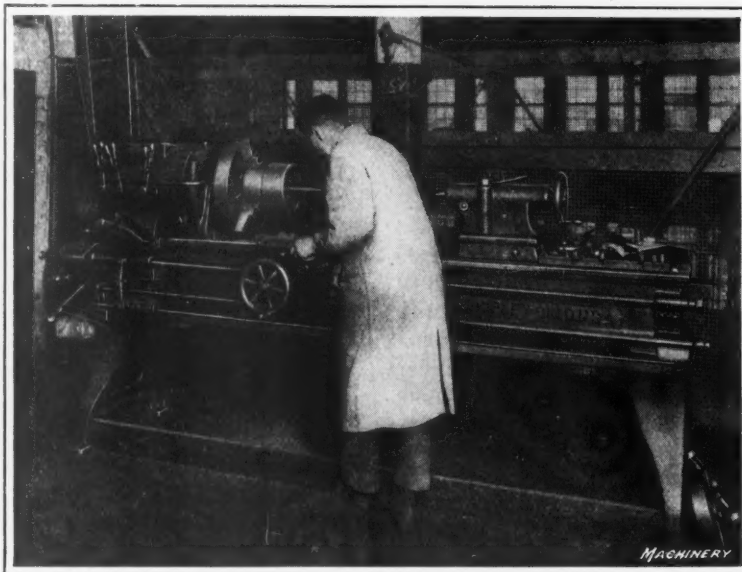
Six Weeks of Intensive Training makes a Good Lathe Operator out of a Beginner
